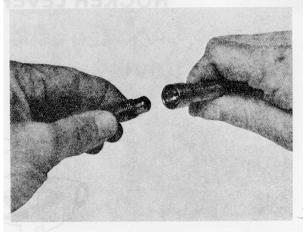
E-4. Check the Rocker Lever Adjusting Screw Ball End
